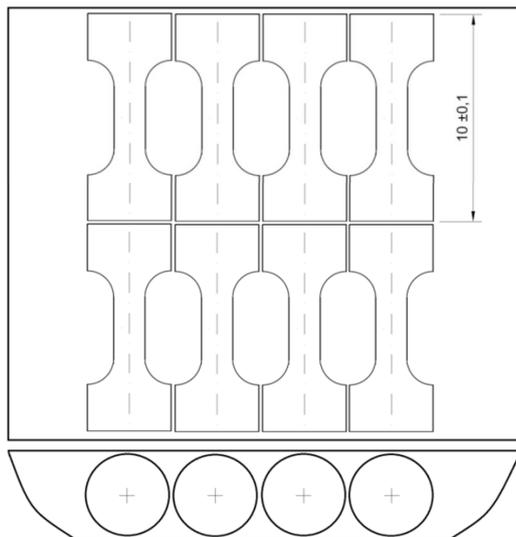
Specimens cutting scheme within EDSE extracted material
